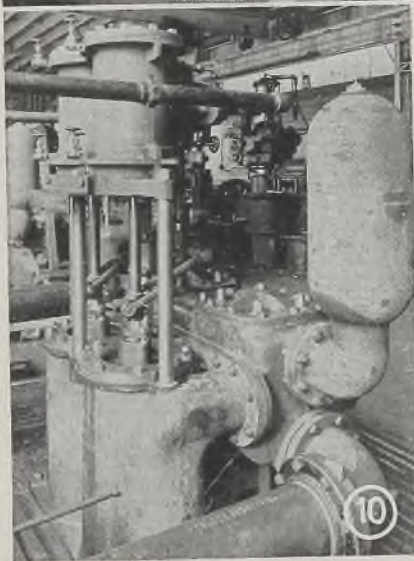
The "GC" Meehanite castings in this 10 x 11 x 12-inch marine pump mounted on test block are hydrostatically tested to 350 pounds per square inch before assembly
